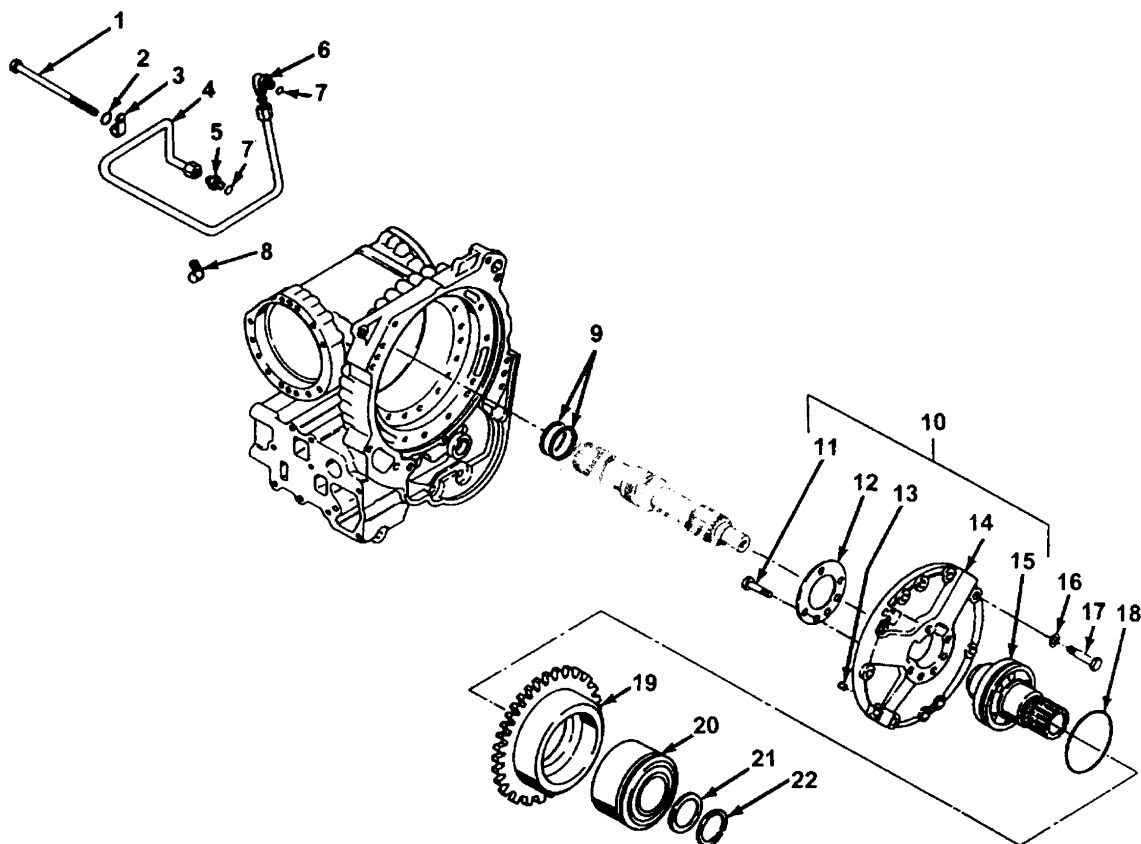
Oil Transfer Diaphragm and Input Pump Drive Gear.
